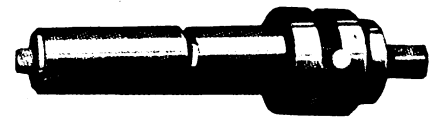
SCULLY RAILROAD TUBE CUTTER
